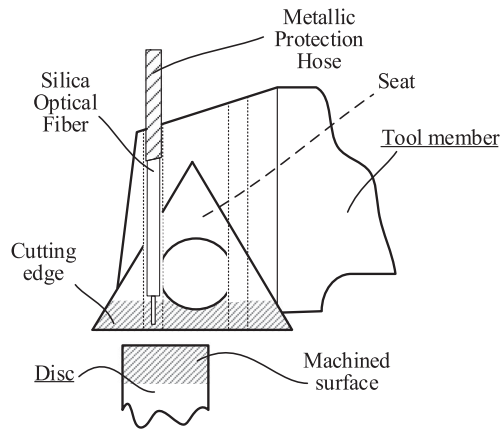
Top view of the tool member with the optical fiber during the orthogonal machining process.
